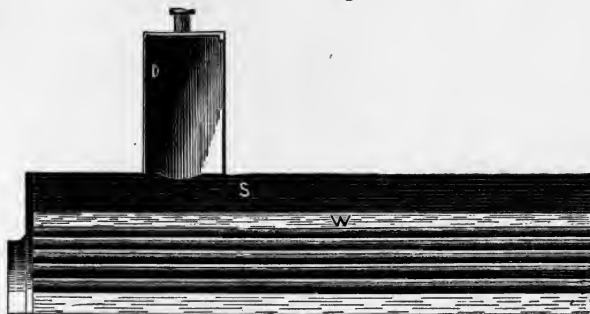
PLATE XI.—Shell of Cylinder-Tubular Boiler.
